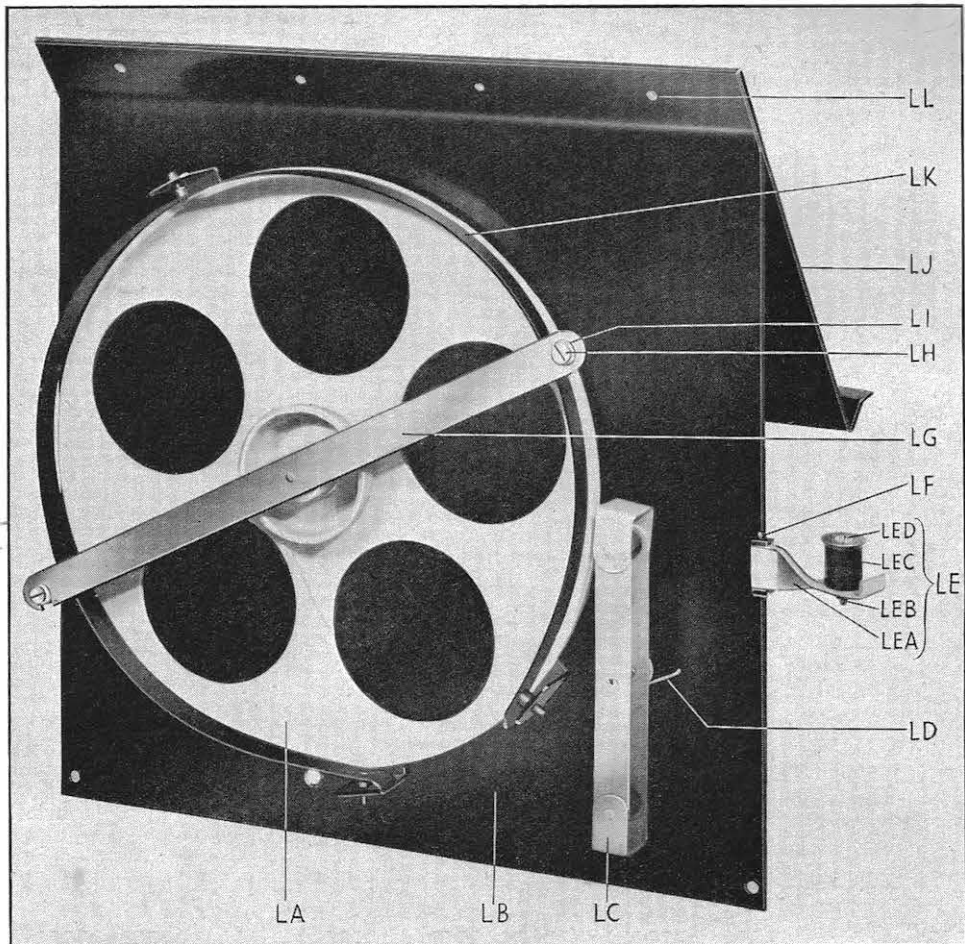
TAPE WHEEL AND MESSAGE RACK C.P. 860/421B.
